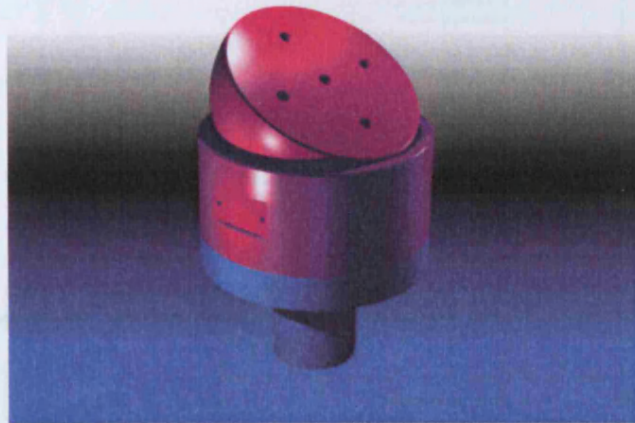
Schematic of a typical hemispherical air-bearing (figure taken from www.specialtycomponents.com)
